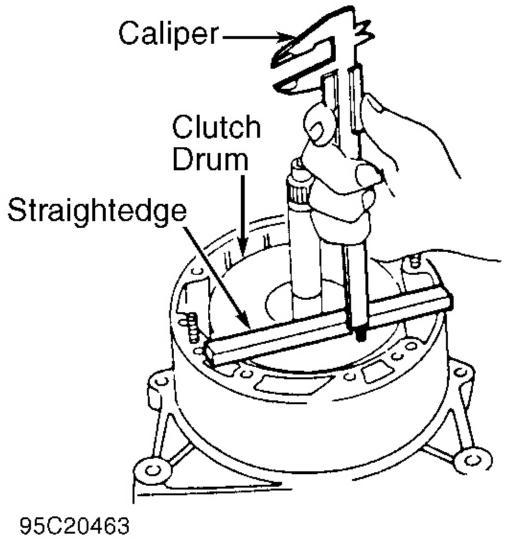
Measuring Input Shaft Depth Courtesy of ISUZU MOTOR CO.
